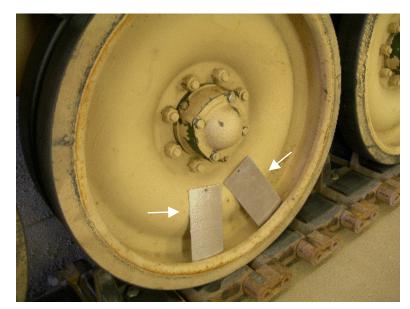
Small aluminum panels placed on wheel (side) of the M1068A3 vehicle used to measure dry film thickness.
